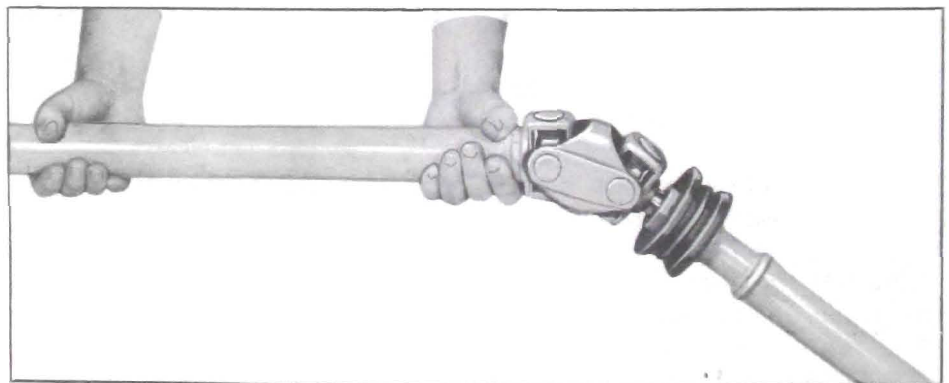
Do Not Carry Propeller Shaft in This Manner
